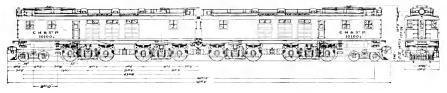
, Outline Drawing of a C., M. & St. P. Locomotive
